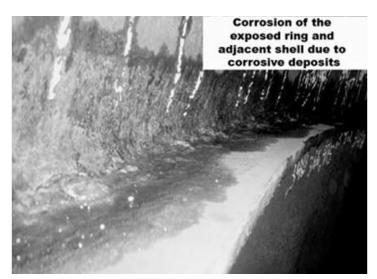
Shell Corroded to Half Wall Adjacent Top Three Rings
